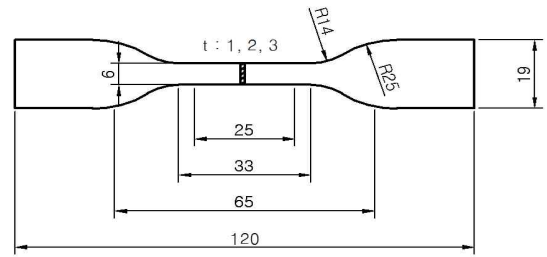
Tensile test specimen of ASTM D 638 TYPE 4 (Unit : mm)
